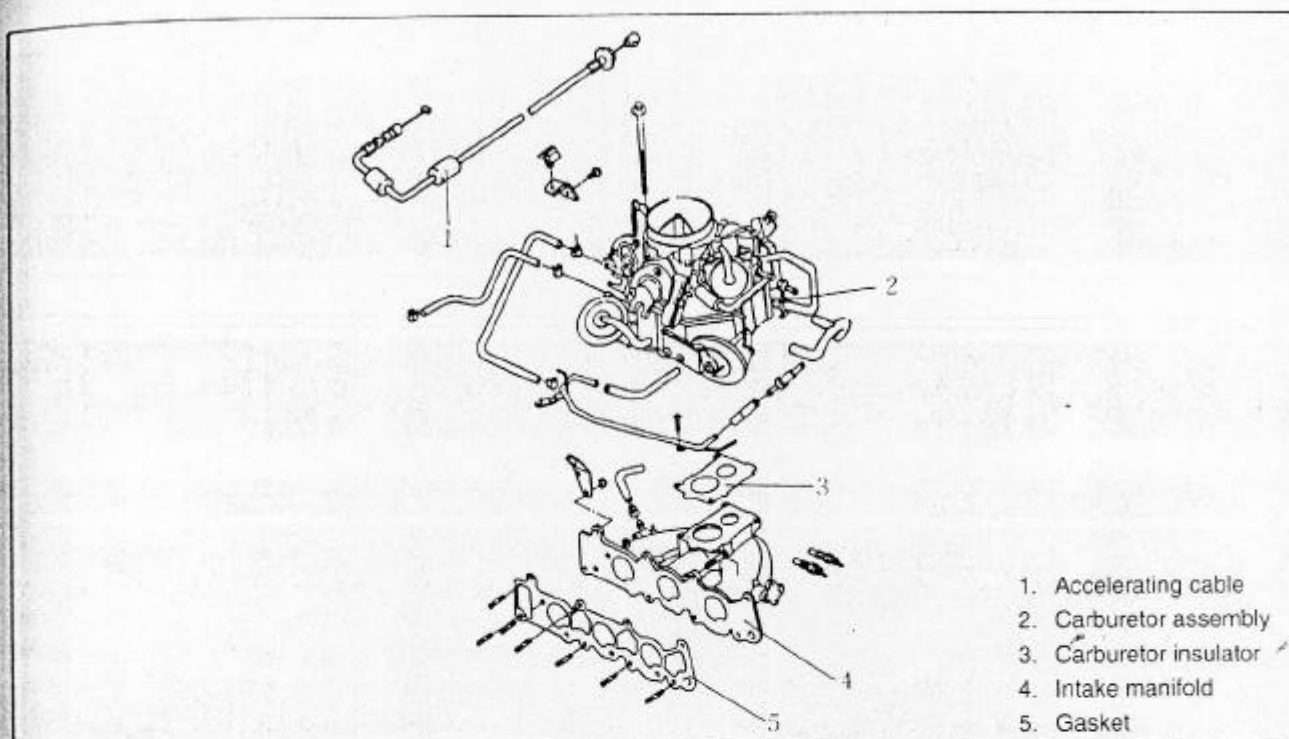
A — 18 CARBURETOR AND INTAKE MANIFOLD
